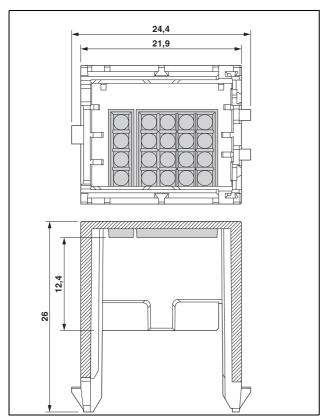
Internal dimensions of the ME-IO 18,8 C 2U MC 7035 housing cover
